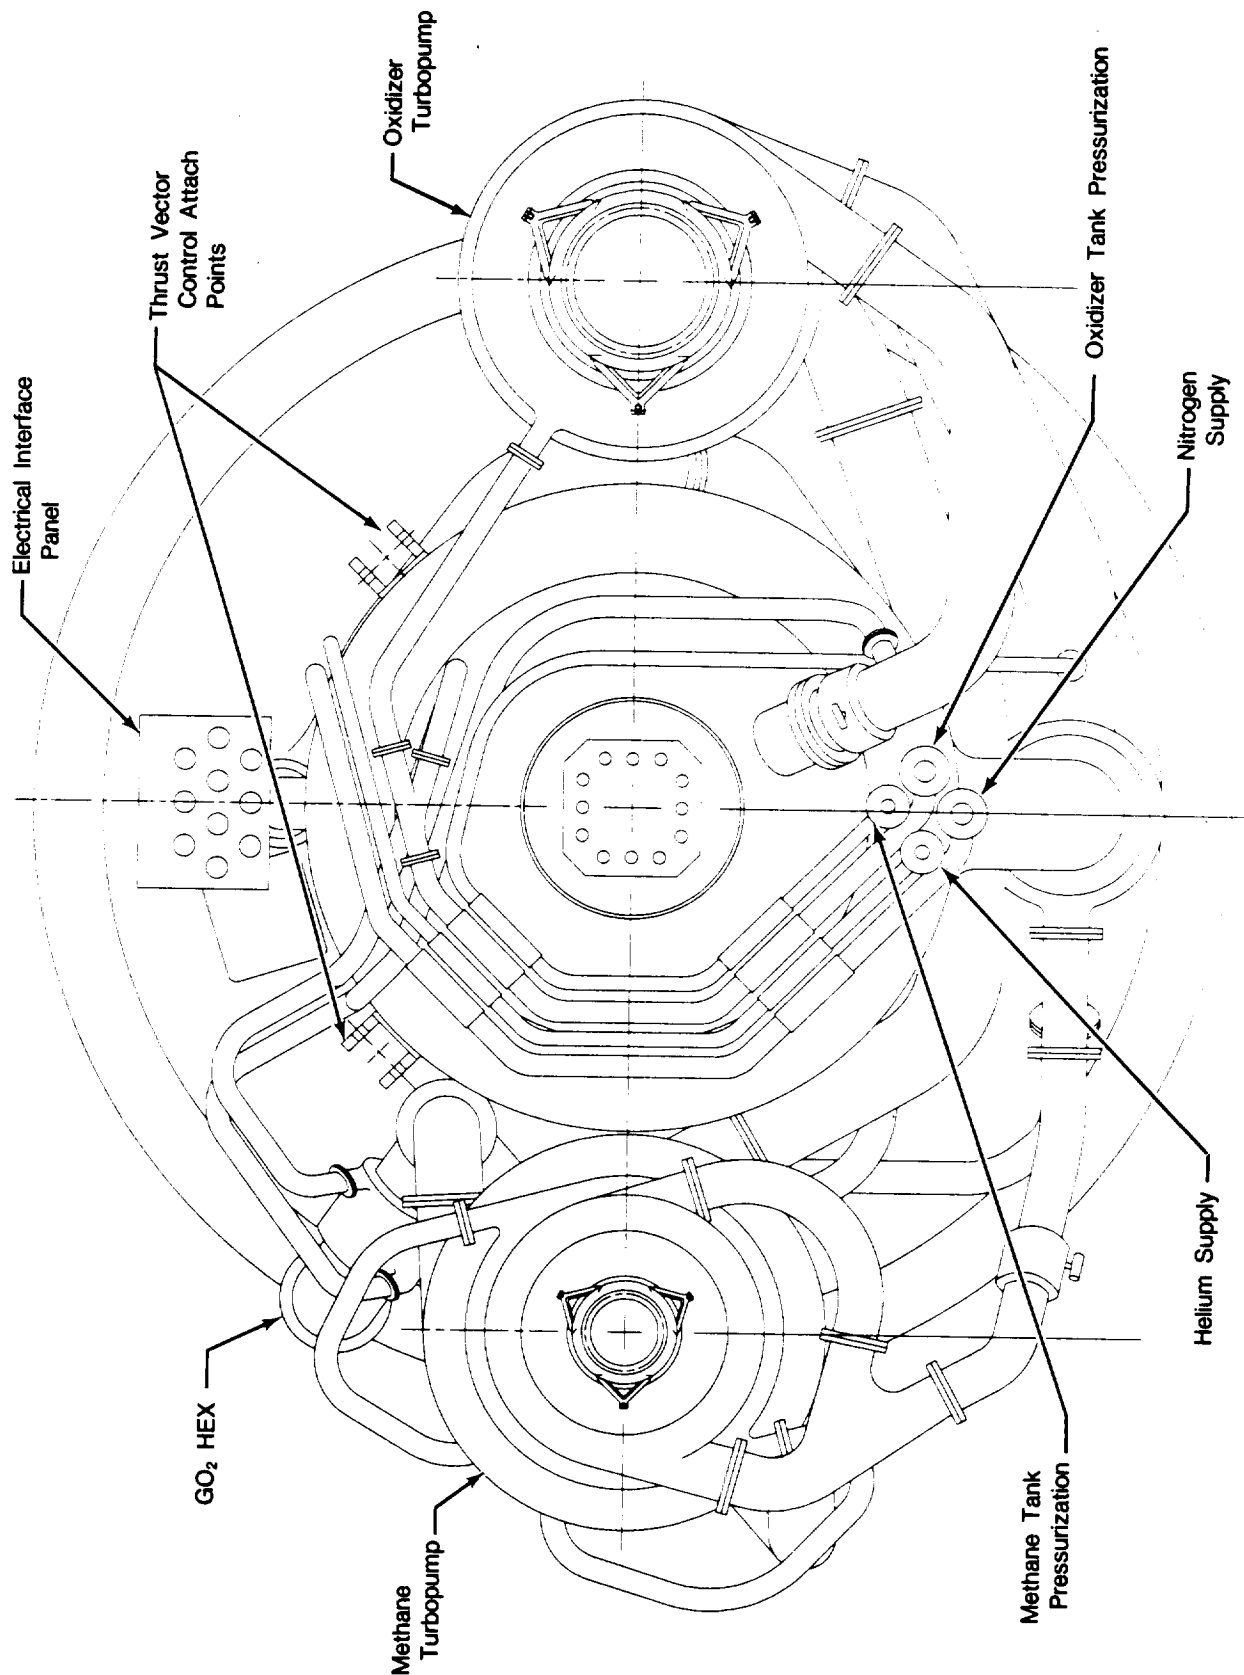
STBE Unique Split Expander Engine Assembly — Top View
